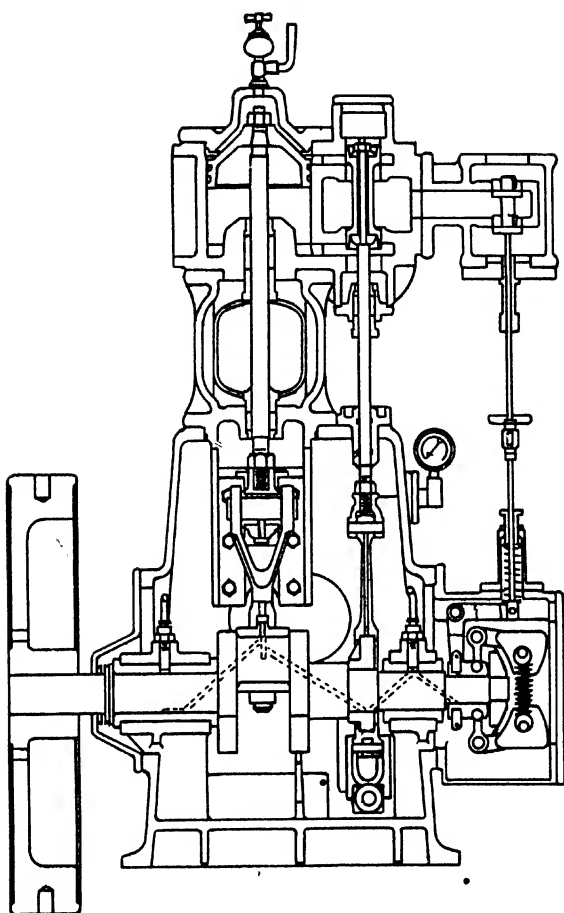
FRONT ELEVATION OF ENCLOSED HIGH-SPEED PISTON-VALVE STEAM ENGINE
